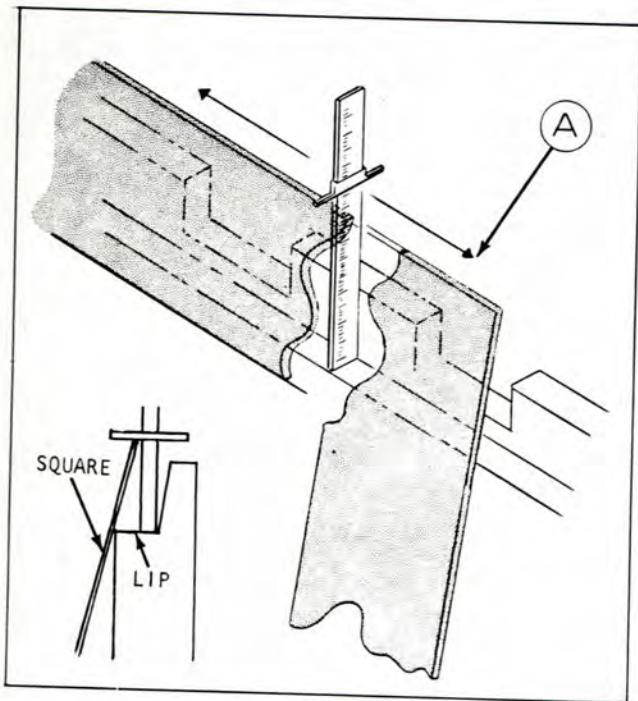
Squaring Carriage Rollers (Six Roller Carriage)
